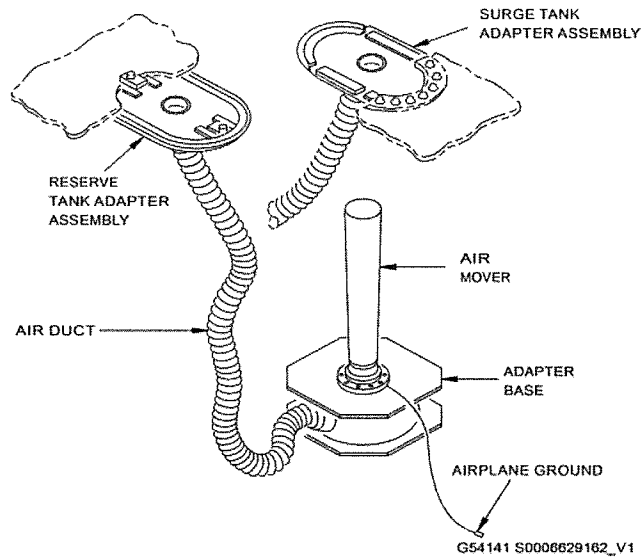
Tank Ventilation Equipment (Sheet 2) / 28-11-00-990-821
